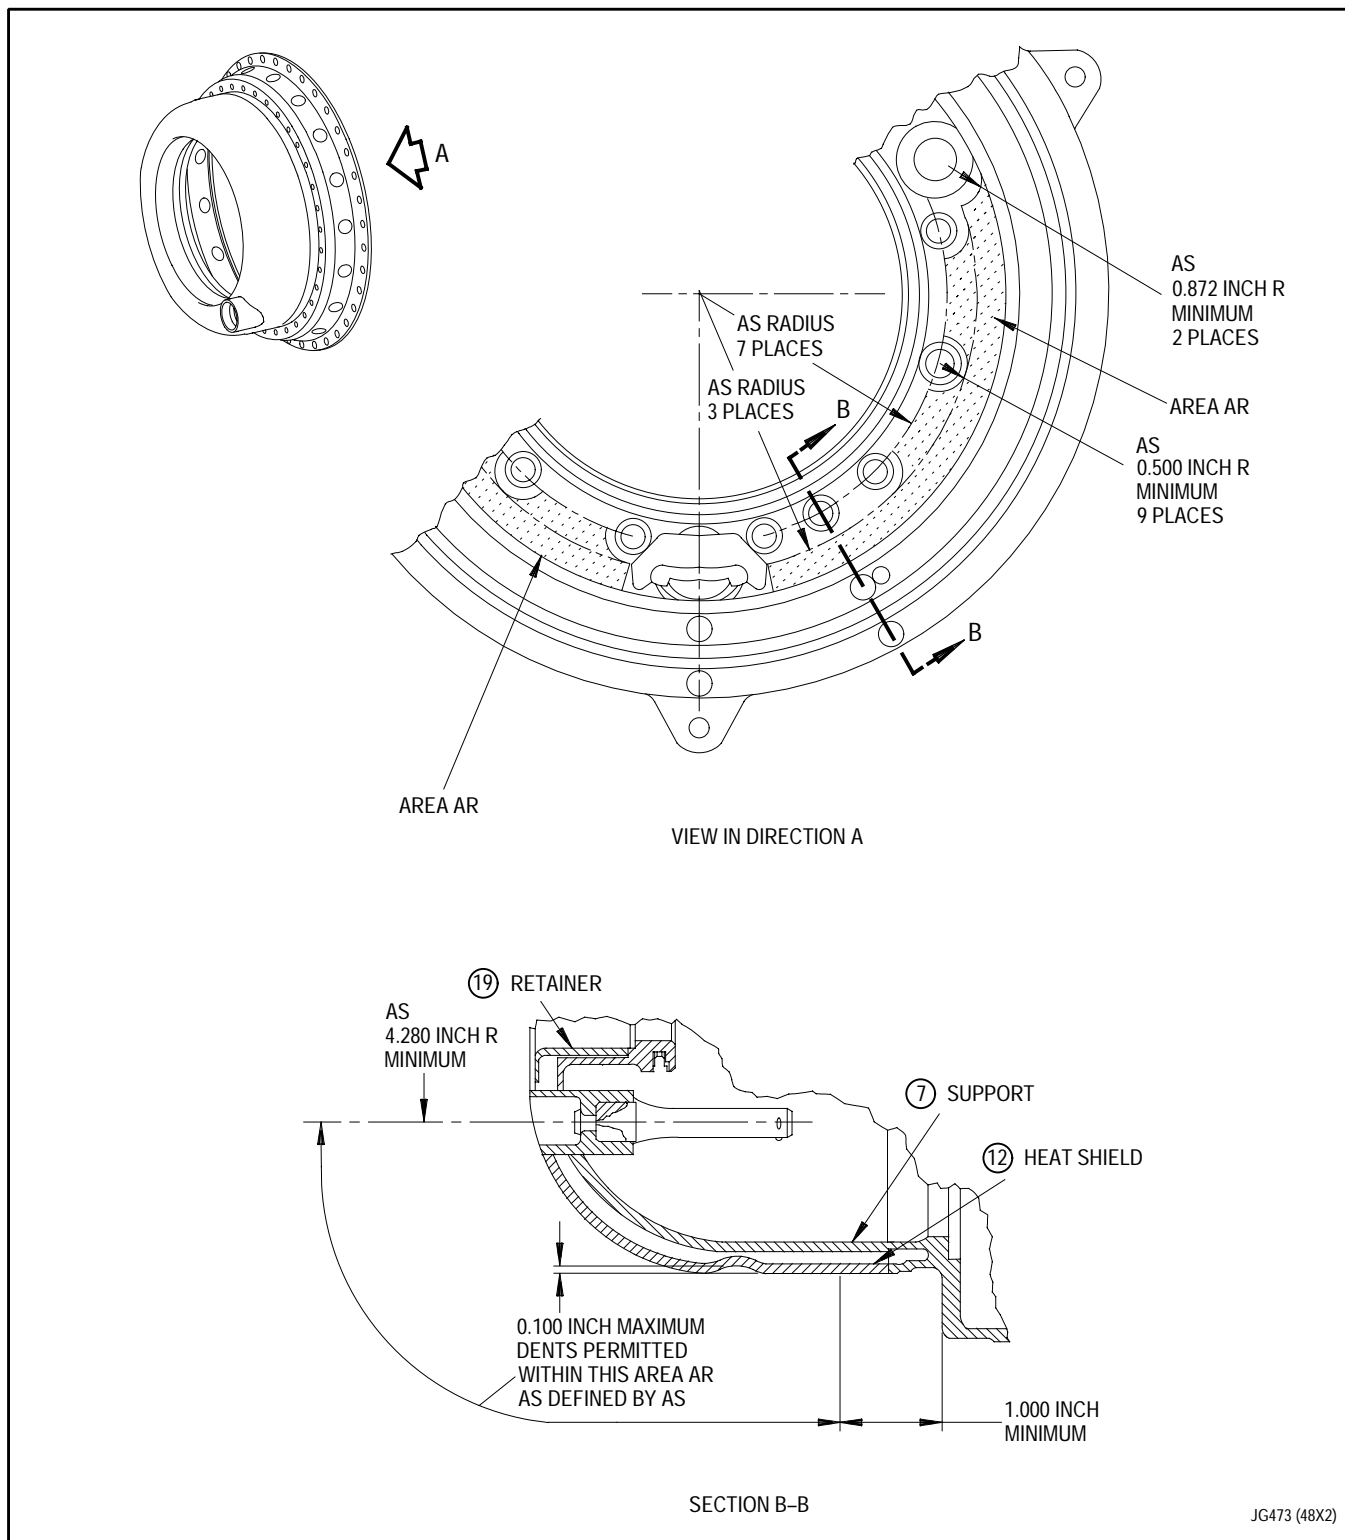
Retainer, Support, and Heat Shield Dent Limits
